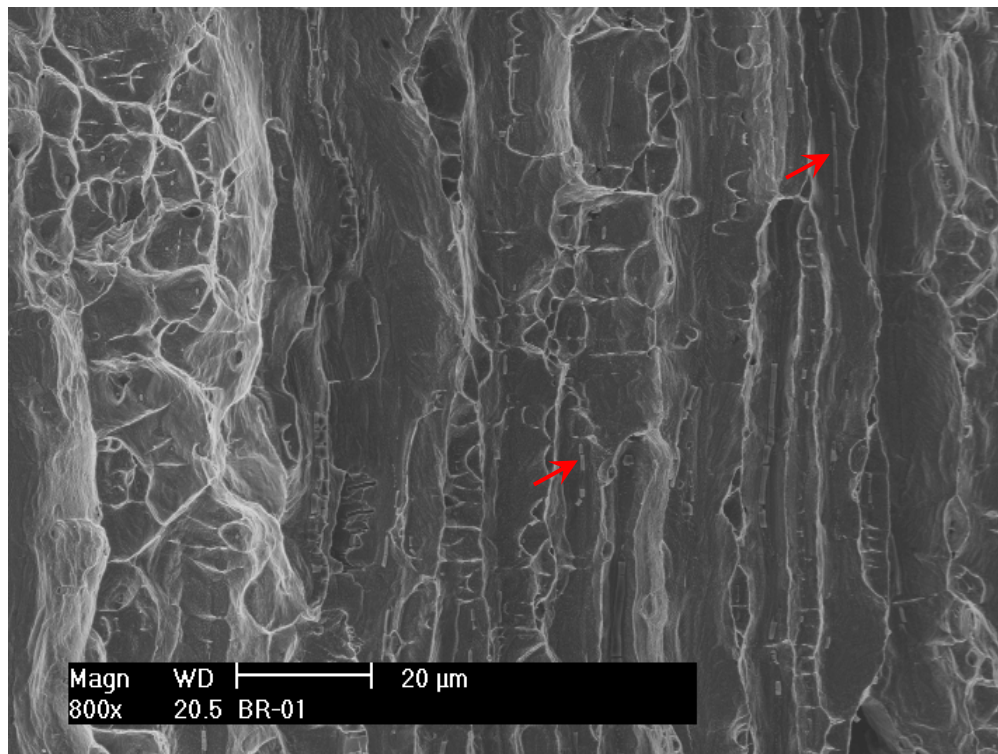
Dimples and banded fracture with stringer inclusions (red arrows) during the J-R curve test of specimen BR-01.
